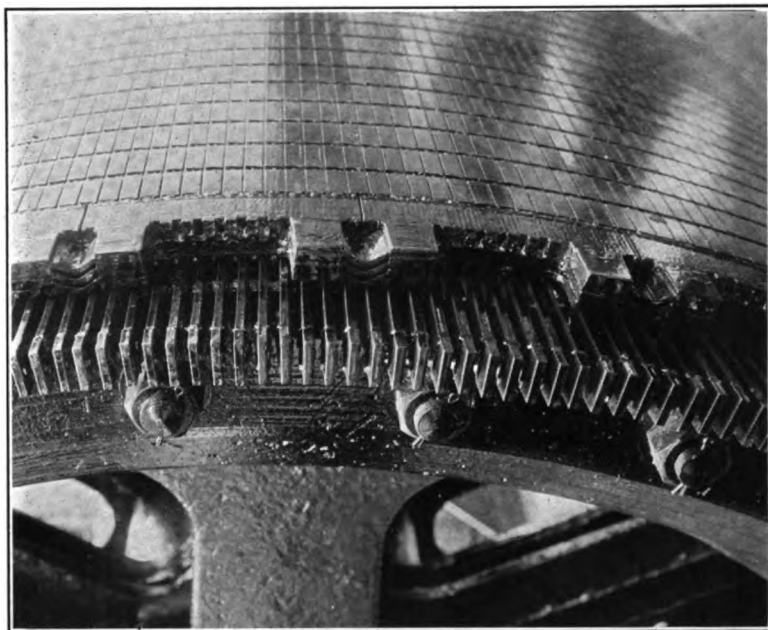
ROTOR WINDING OF MAIN MOTOR.
